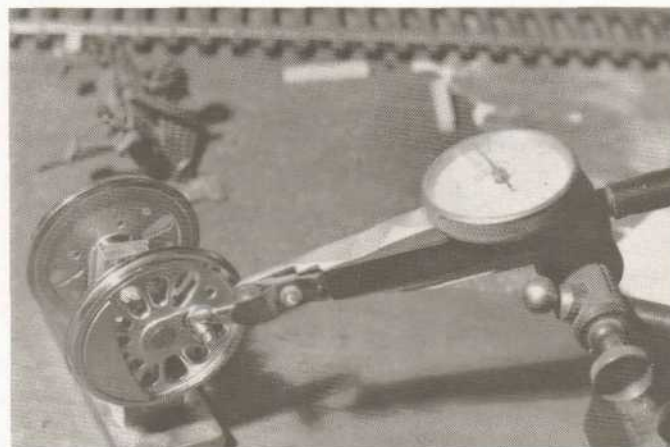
The surface gauge and quartering jig are being used to check the position of the crankpin.
